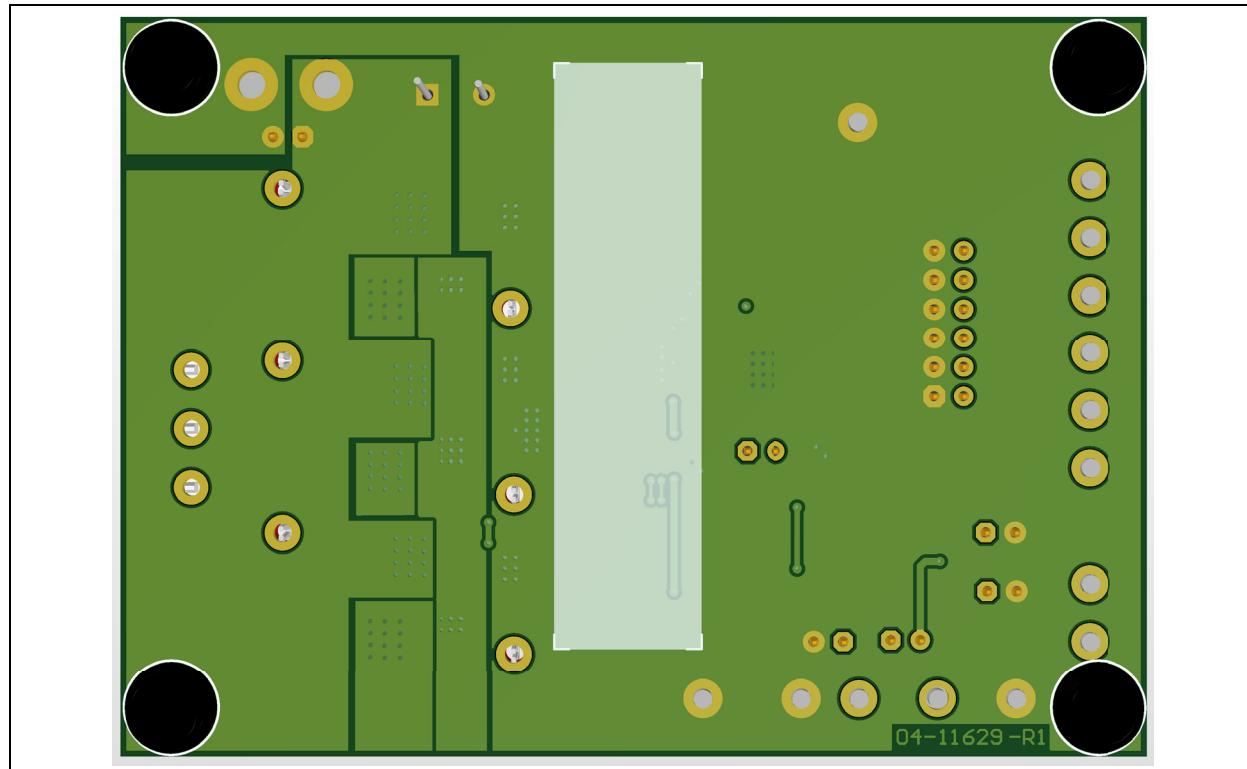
MIC4607A MOSFET Driver Evaluation Board PCB (Bottom).
